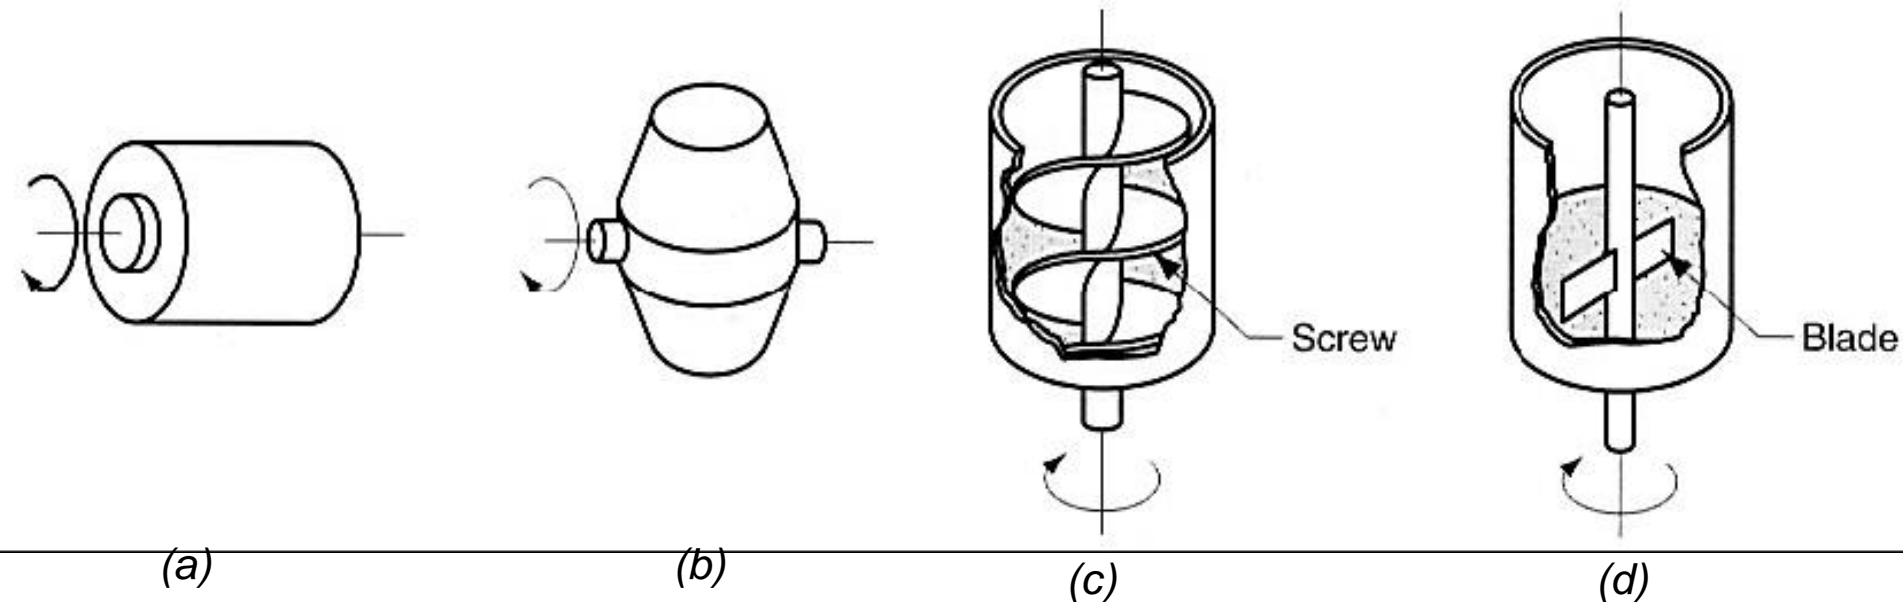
Several blending and mixing devices: (a) rotating drum, (b) rotating double cone, (c) screw mixer, (d) blade mixer
